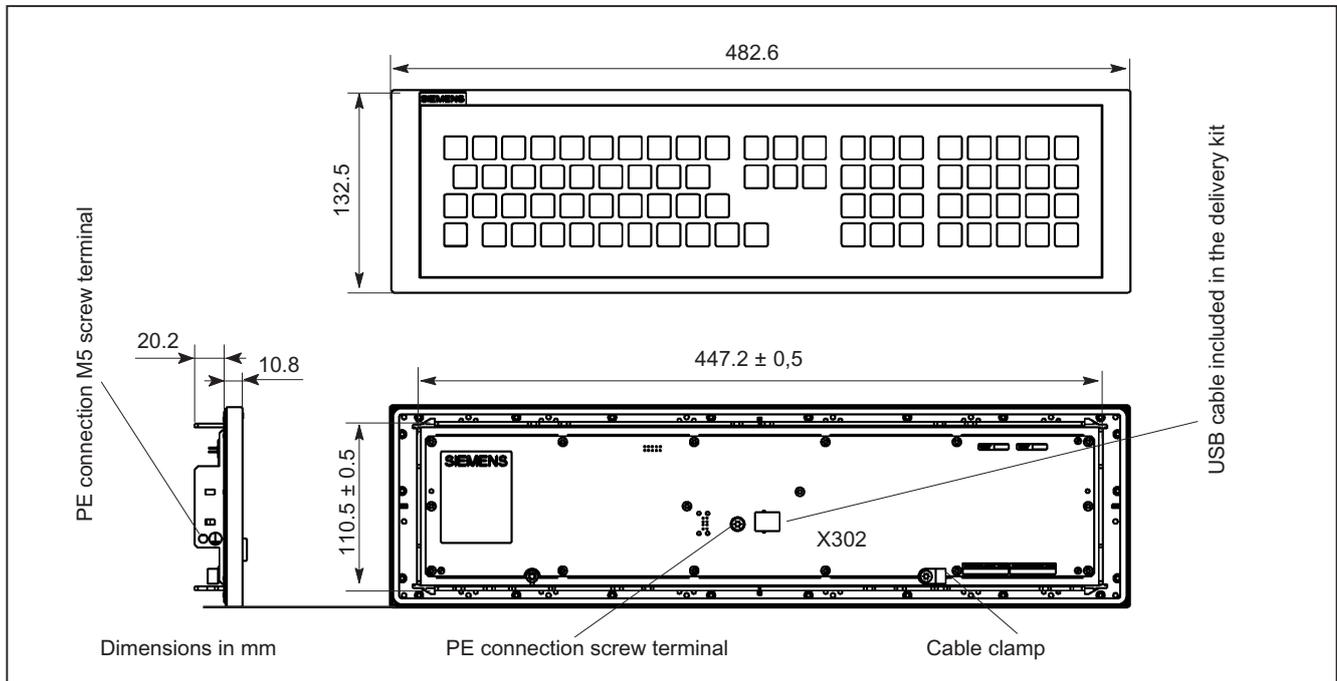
Front, side and rear views of CNC full keyboard KB 483C
